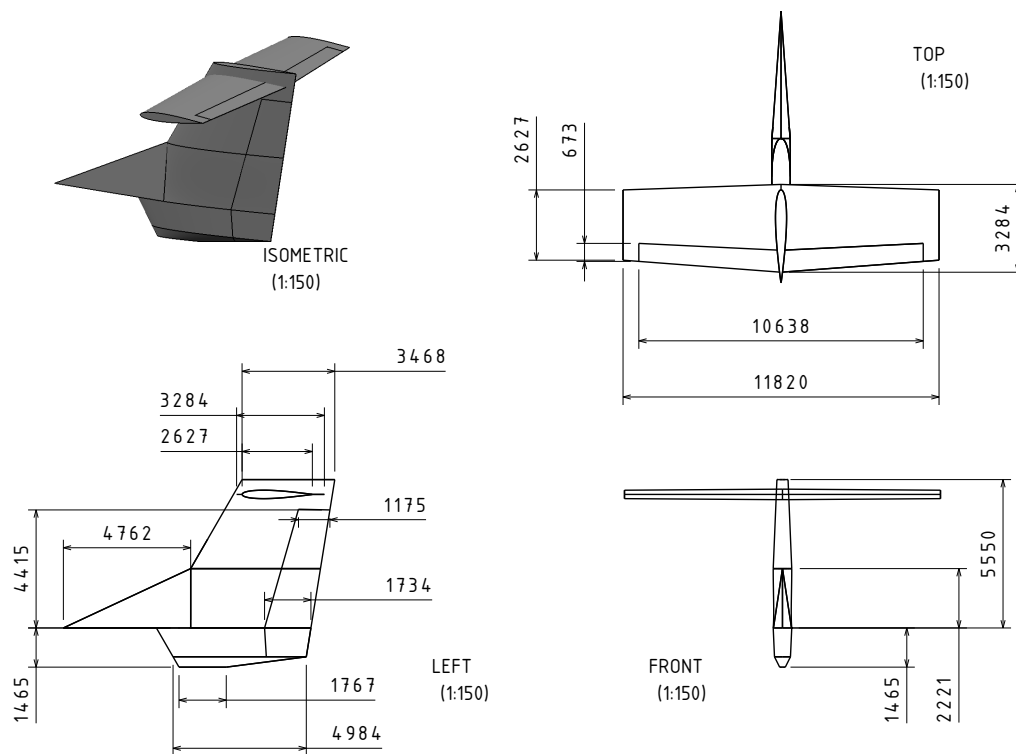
Technical Drawing of the Empennage (units in mm)
